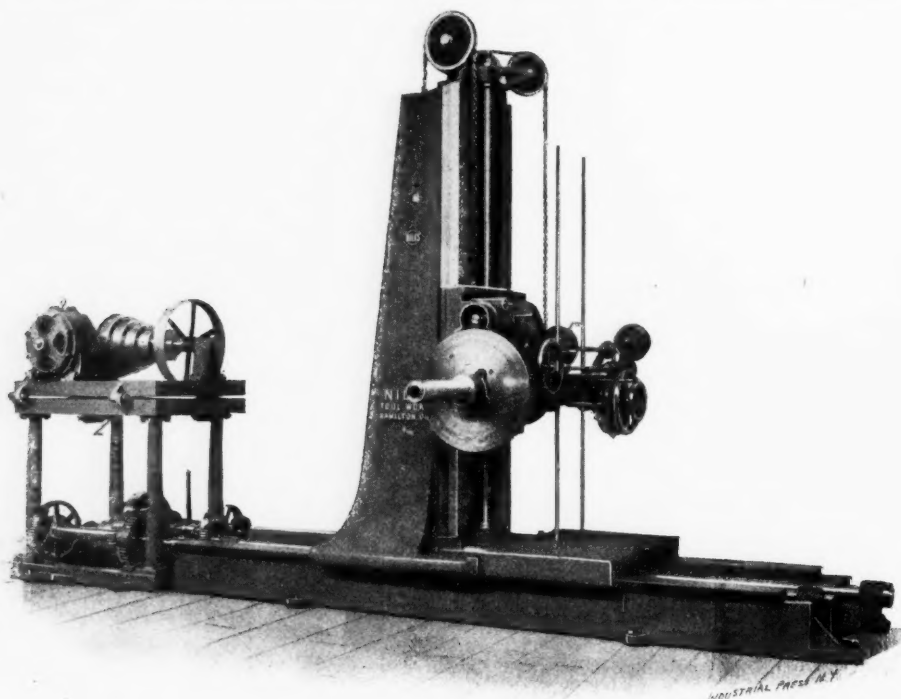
Horizontal Boring, Drilling and Milling Machine; Constant-speed Motor; Belted Connection.
